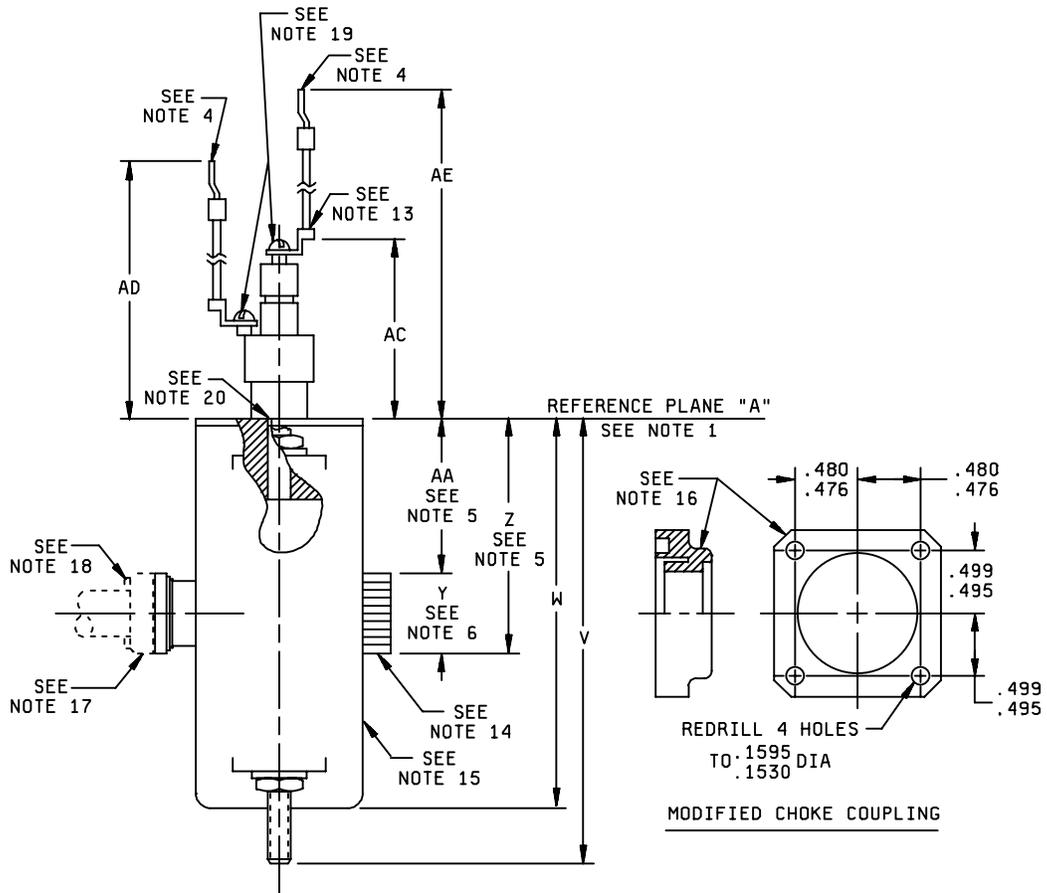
Outline and dimensions. - (Side view) - (Continued).
